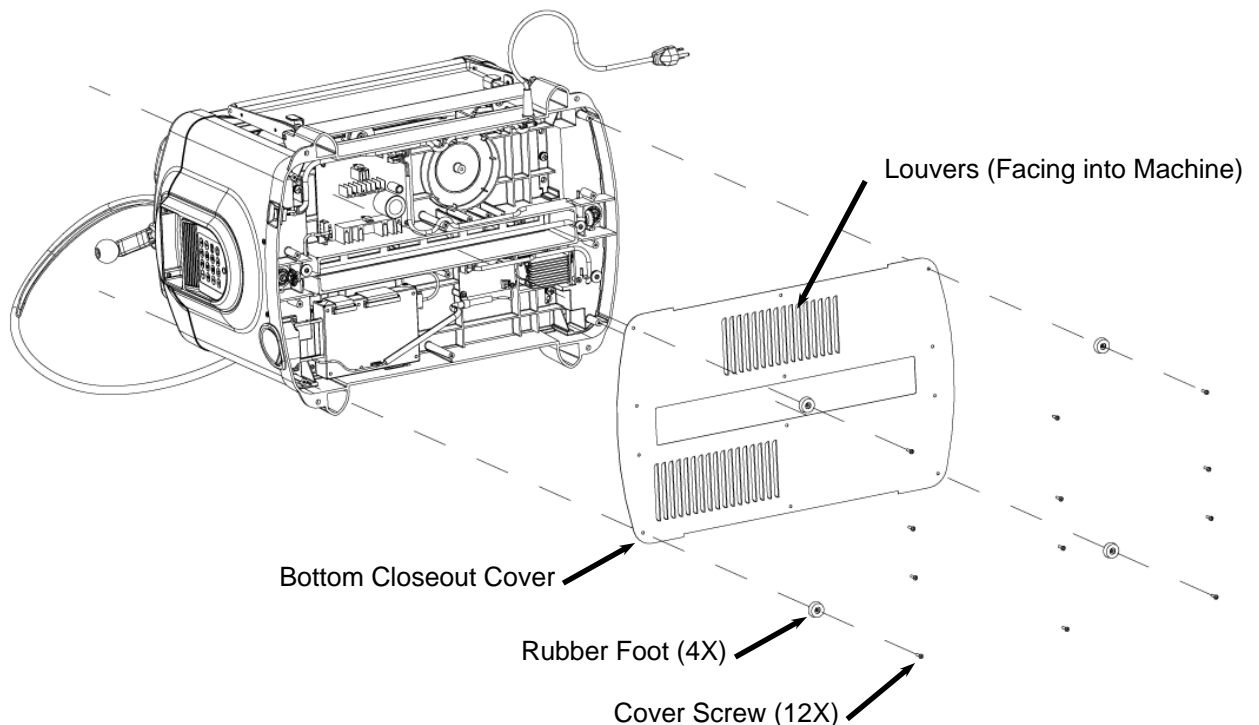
REMOVAL OF THE BOTTOM COVER
